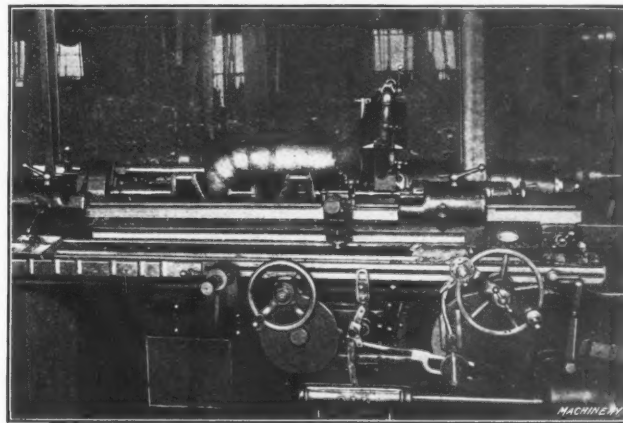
Grinding the Gear Fit on the Norton Grinder
